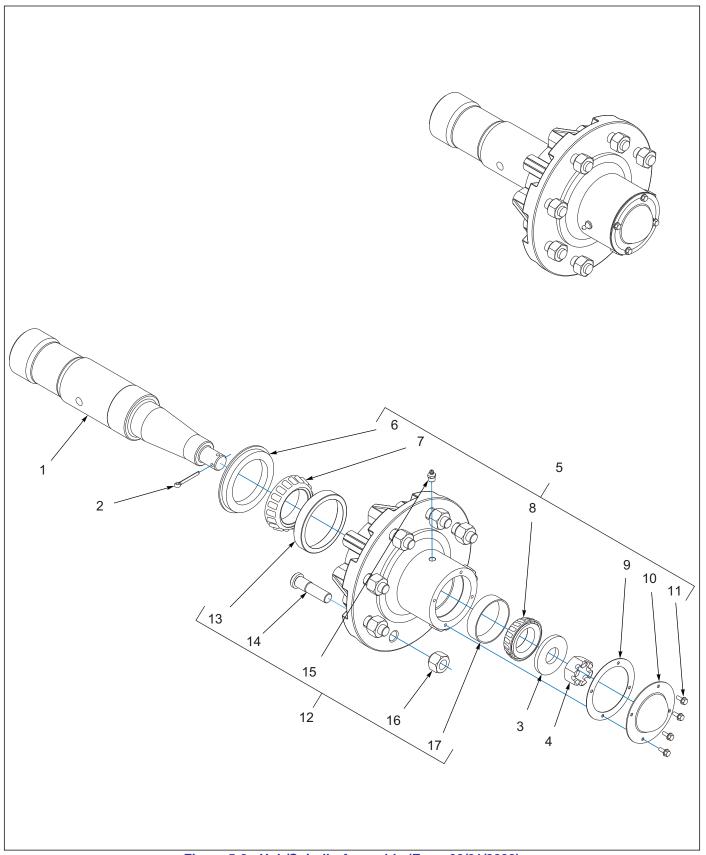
Hub/Spindle Assembly (From 06/01/2022)
